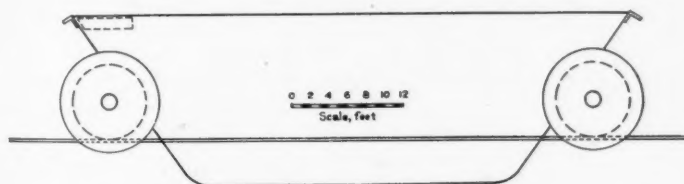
Side view of 18-cu. ft., 4-wheel tram car
